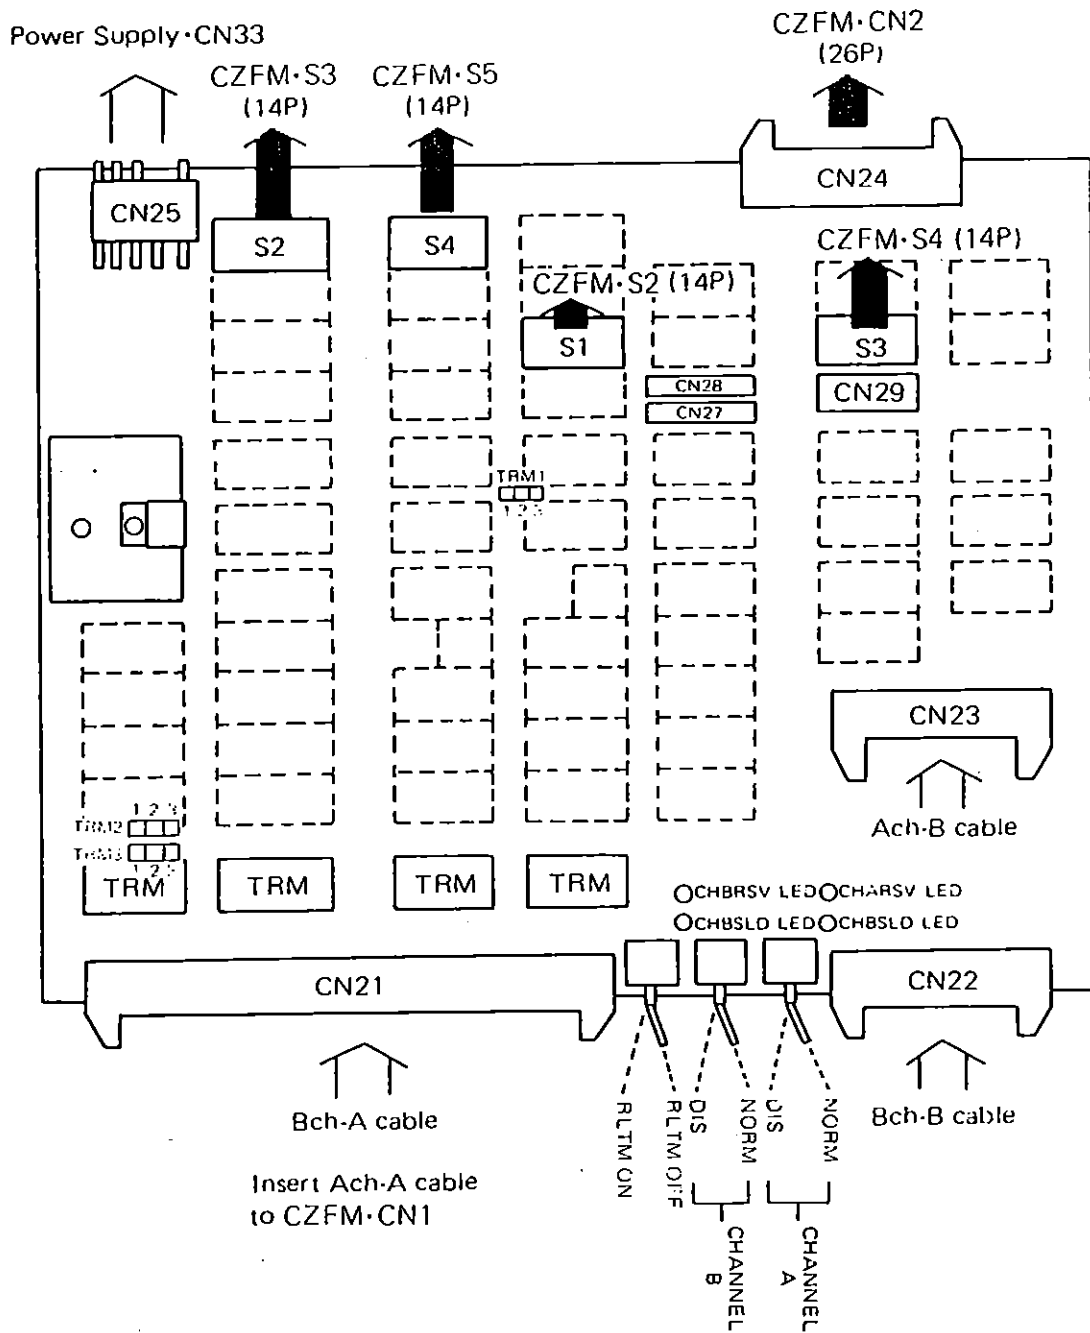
Dual Channel PCB Assembly Connector Location
